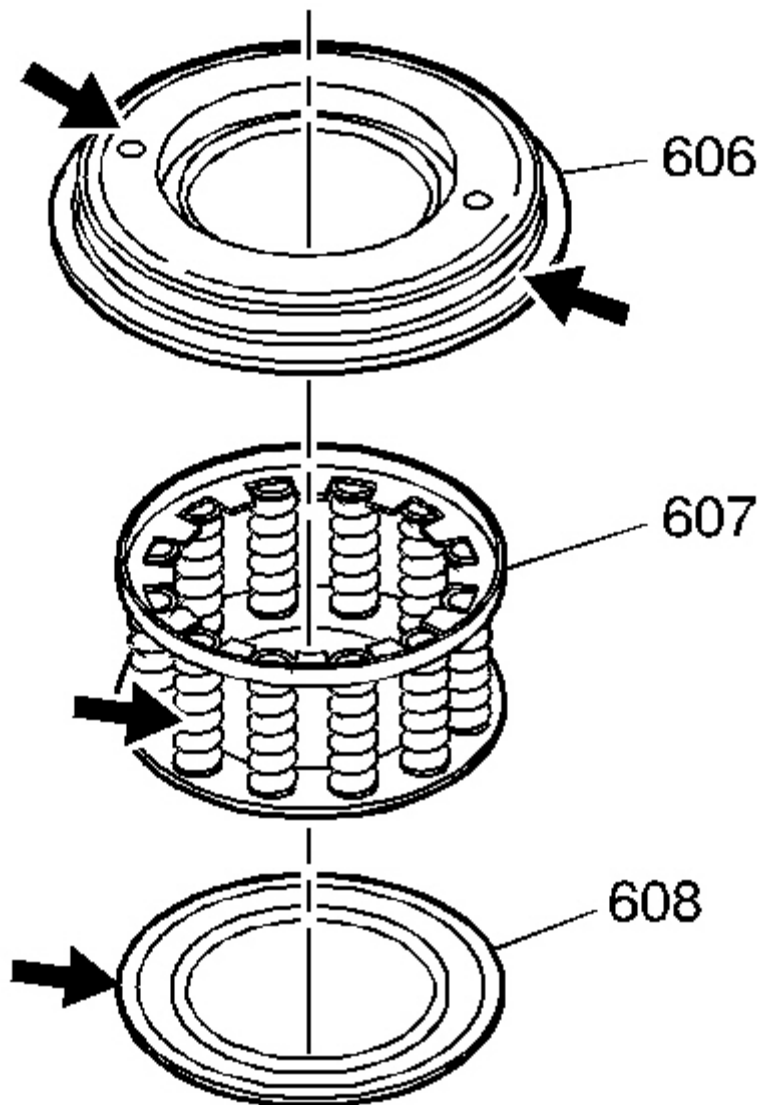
Inspection Areas On Third Clutch Piston Assembly Seals
